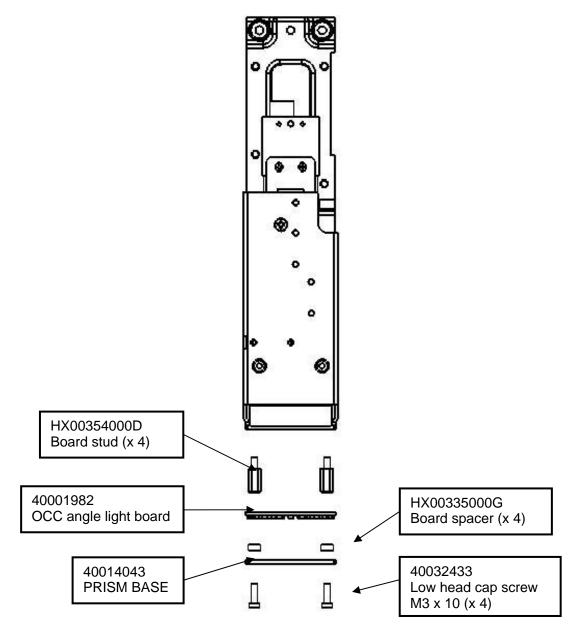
Replacing the Offset Placement After Solder Screen-Printing Light
